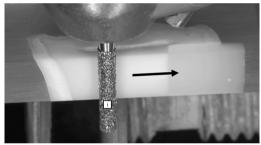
Magnified view of grinding area i) Straight cylinder type diamond point (FG Regular 211, 1.4 mm diameter)
